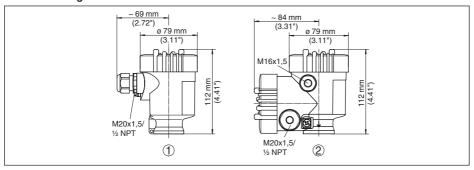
Housing versions with protection rating IP 66/IP 67 - with integrated display and adjustment module the housing is 9 mm/0.35 in higher
